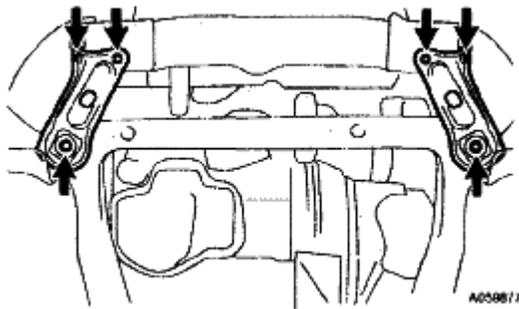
Locating Bolts, Nuts And Frame Side Rail Plate RH And LH
